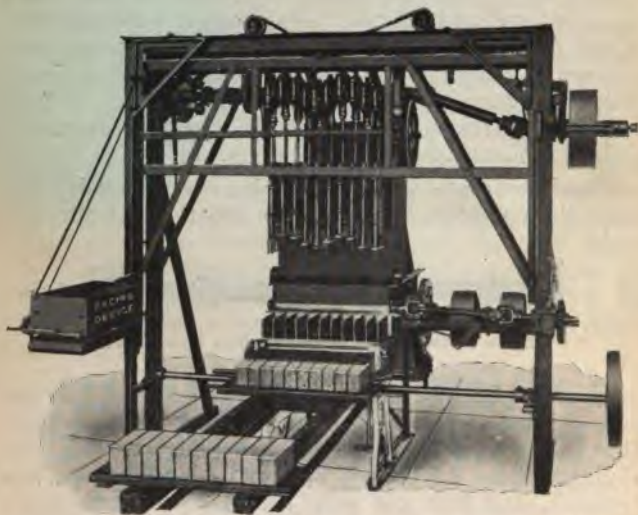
POWER TAMPER OPERATING IN CONNECTION WITH BRICK MACHINE, EQUIPPED WITH DEVICE FOR HANDLING FACING MATERIAL
